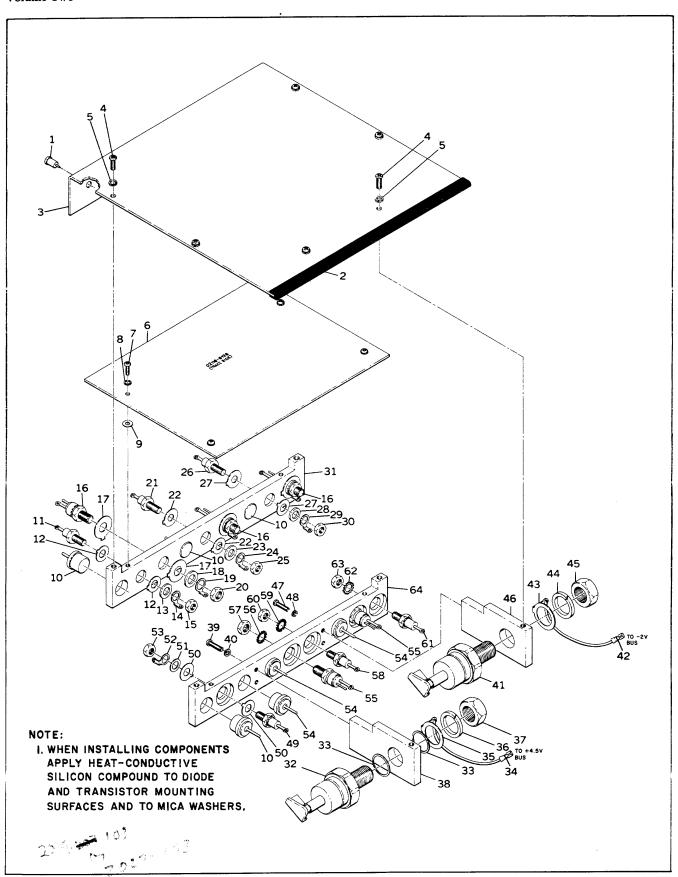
A121 Overvoltage Protection Assembly (02116-6284), Exploded View
